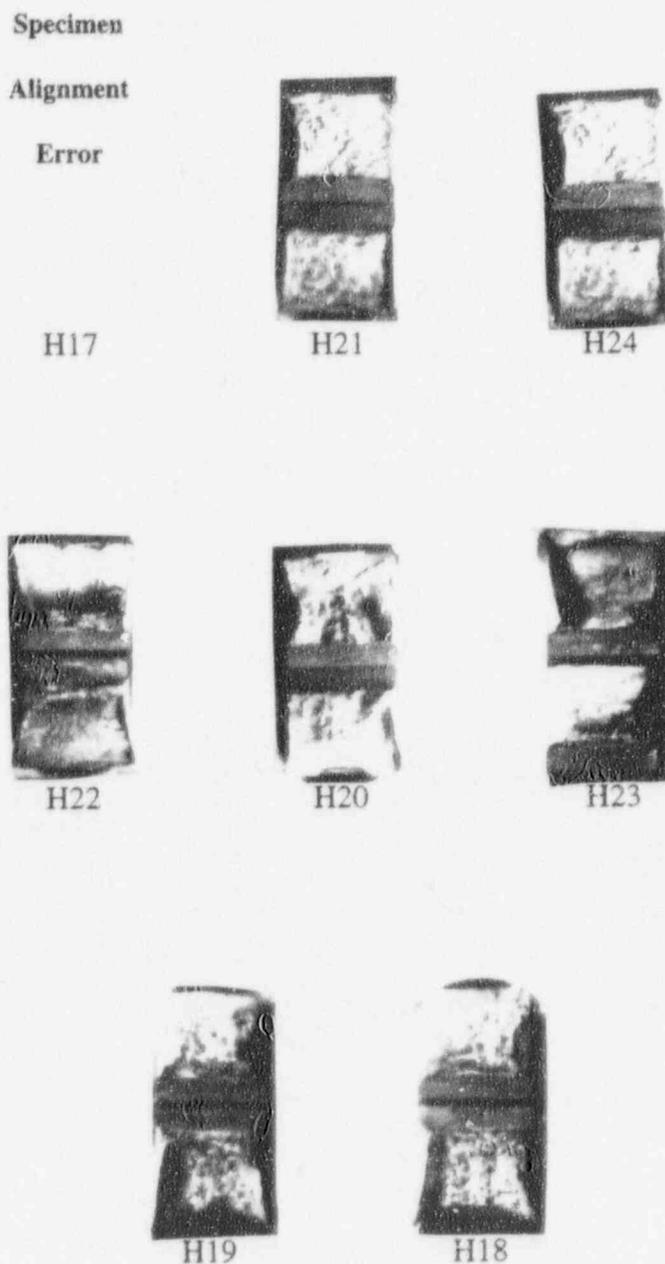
Charpy Impact Specimen Fracture Surfaces of the Prairie Island Unit 1 Reactor Vessel Weld Heat-Affected-Zone (HAZ) Metal
